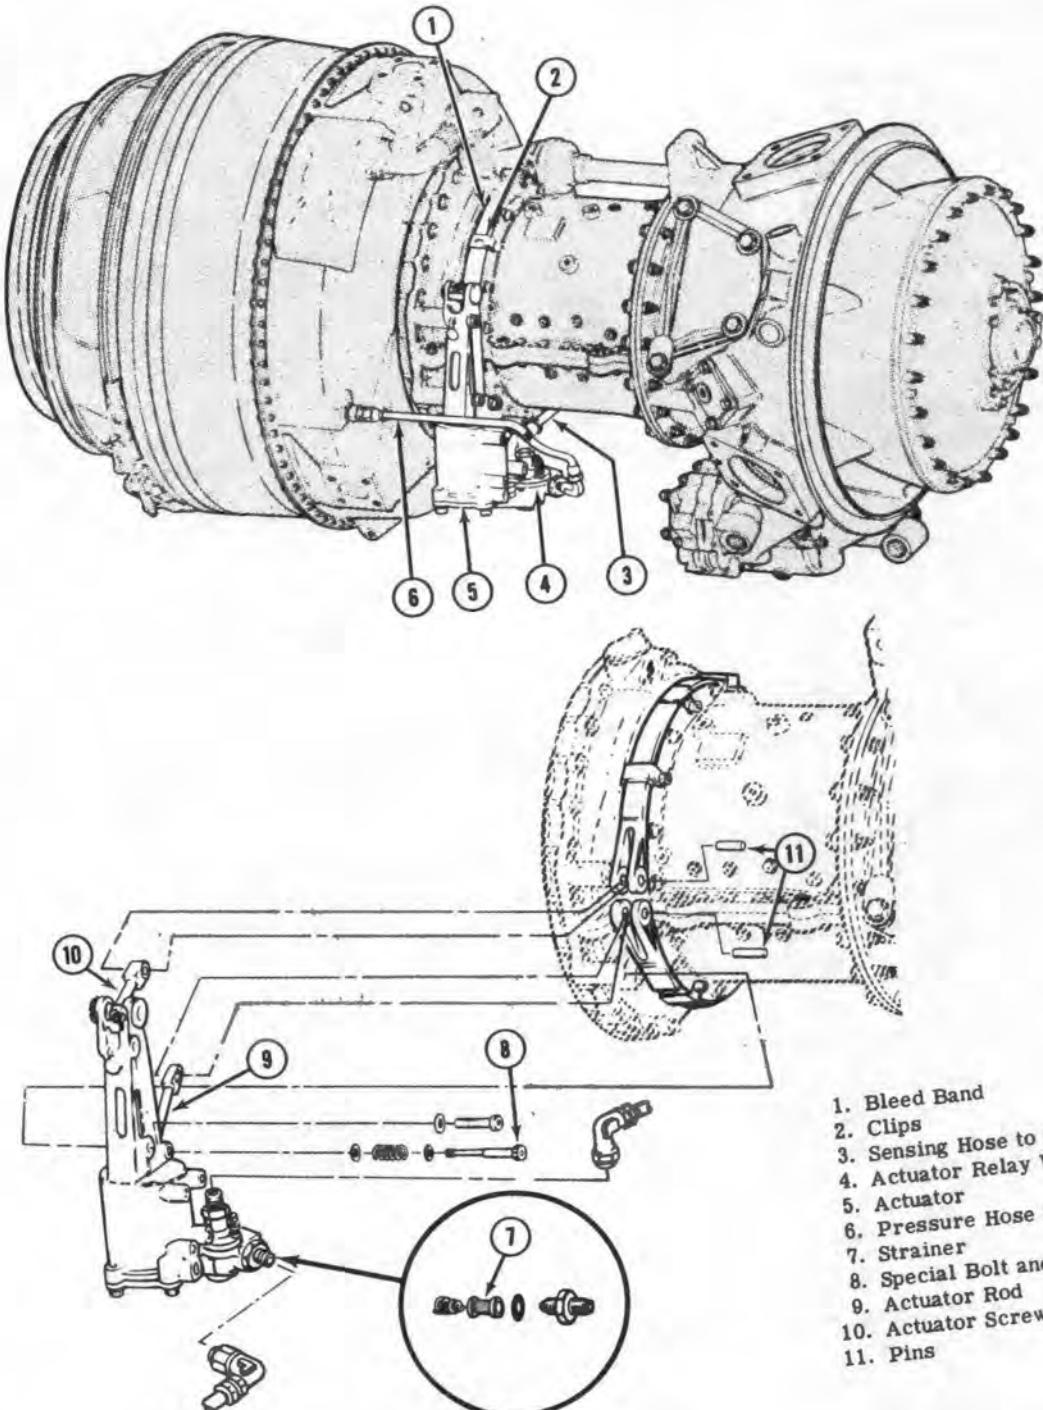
Interstage airbleed system — T53-L-11 engine
